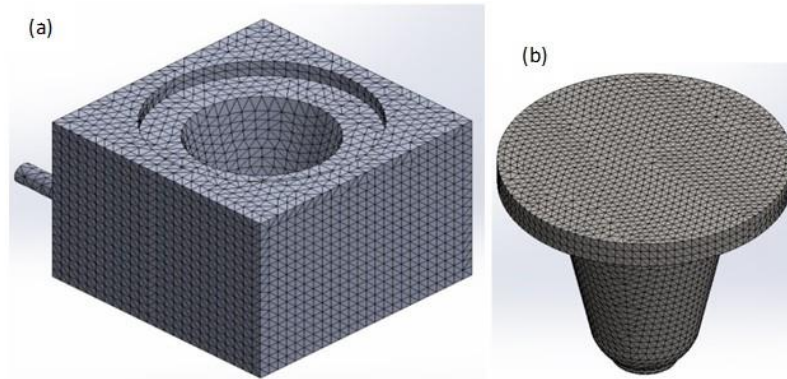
Mesh of the mould (a) female mould, (b) male mould.
